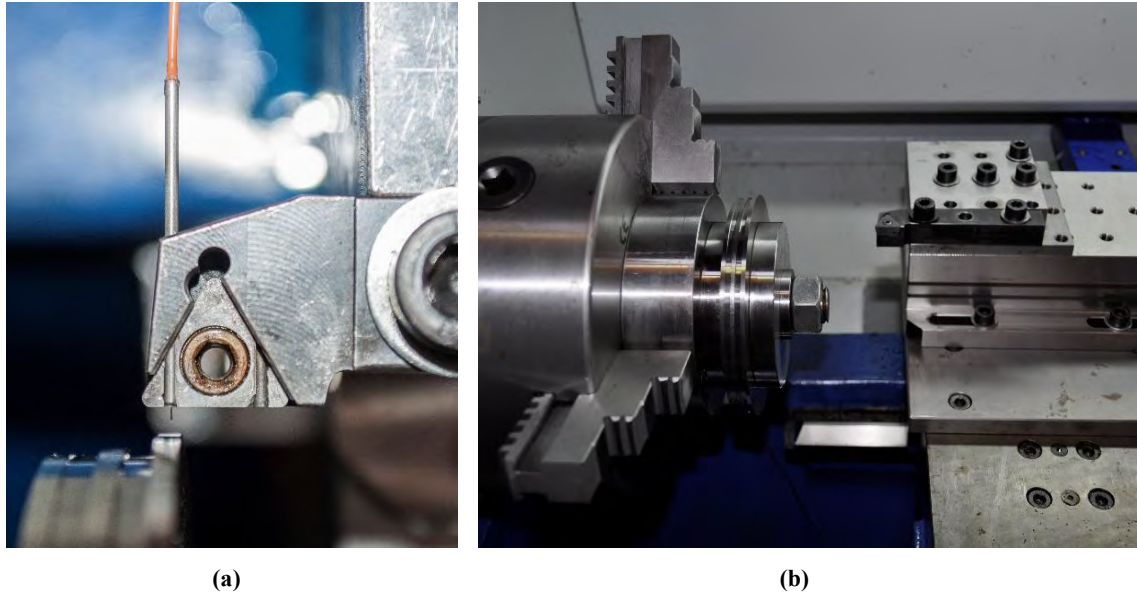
(a) Visualization of the distance between the optical fiber and the workpiece (tool insert is removed). (b) Photograph of the lathe with the machining tool.
